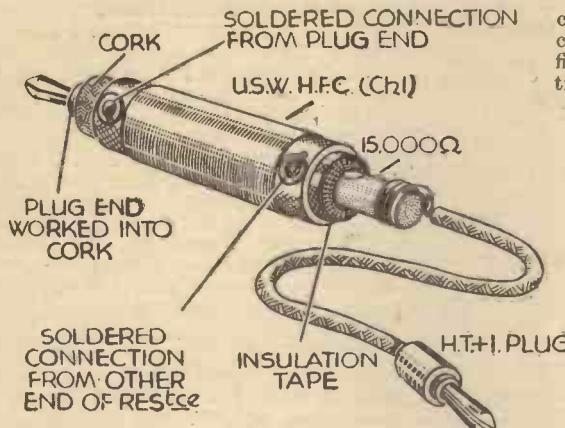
Method of arranging the H.F. choke in the H.T. lead
